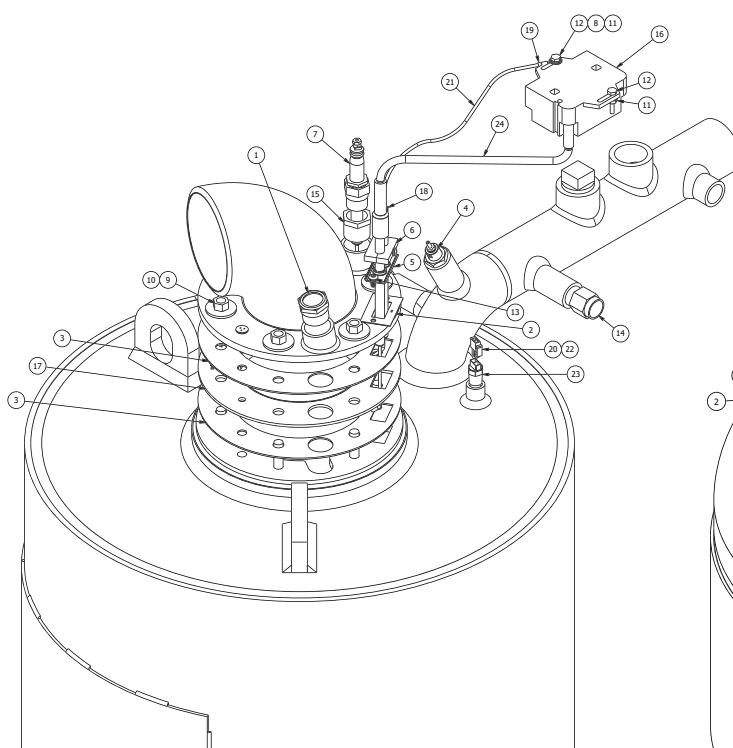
EDR-750-1000 BURNER REGION ASSEMBLY
